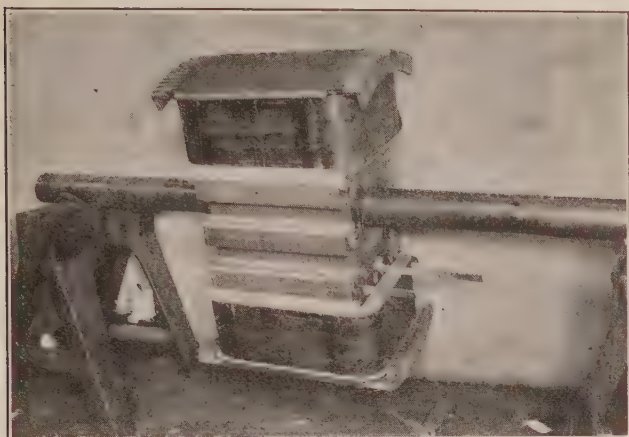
PARTIALLY ASSEMBLED, 4-POLE ROTOR, SHOWING WELDED DAMPER CONSTRUCTION
